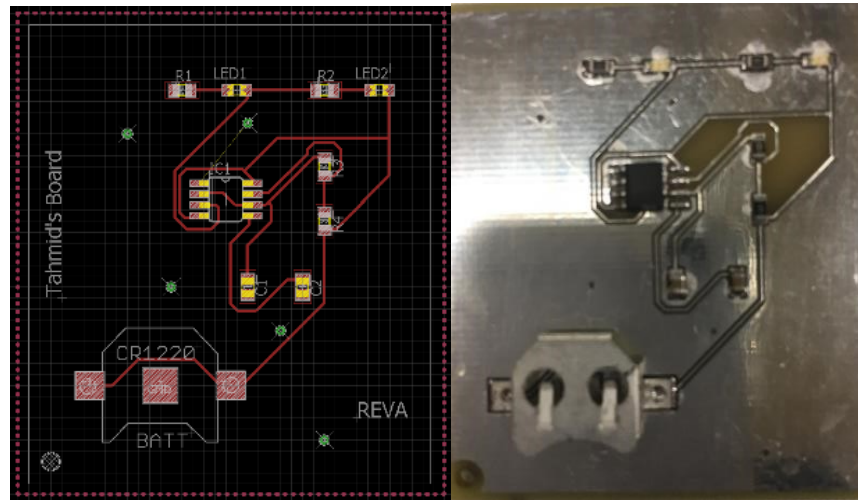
Developing a PCB: A PCB layout (left) and a PCB board (right)
